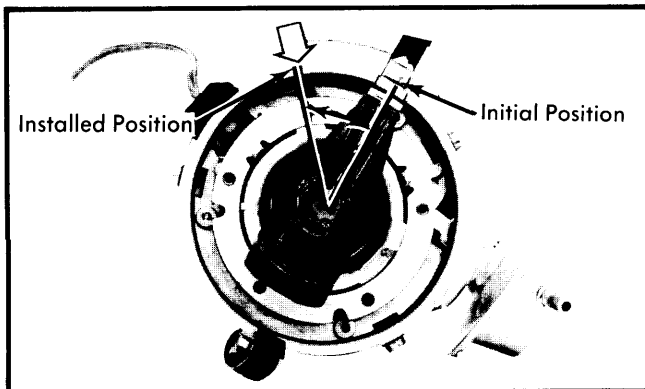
Distributor Rotor Position Prior to Final Positioning
